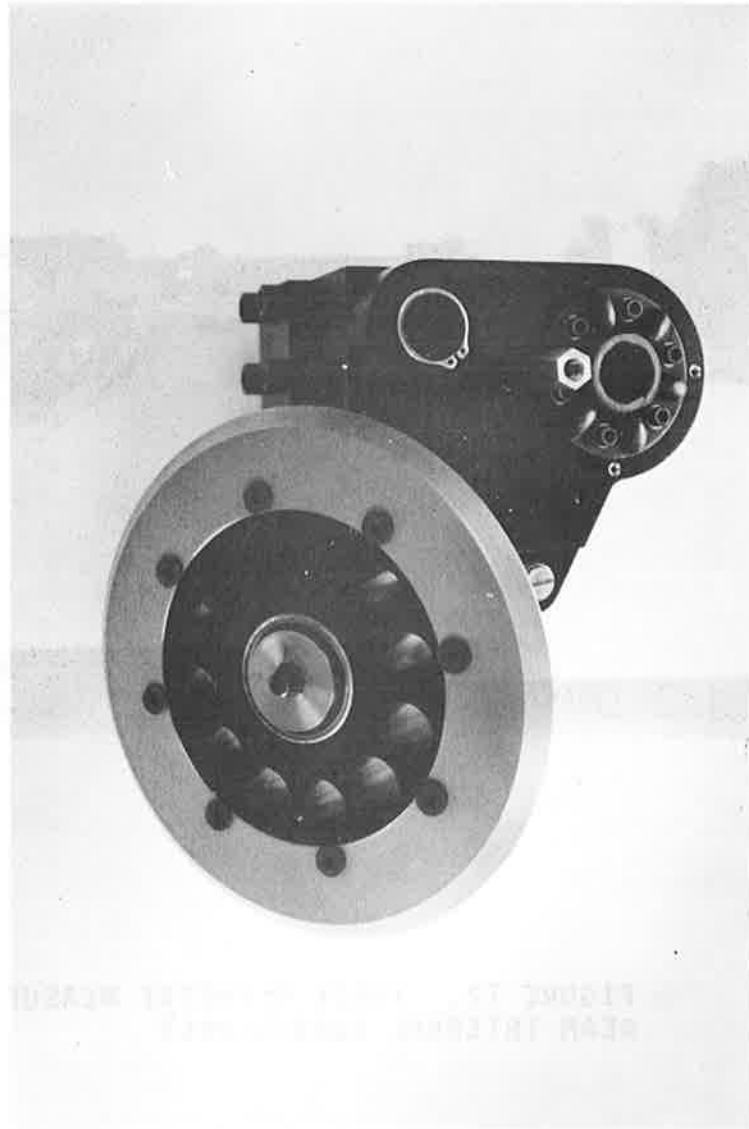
GAGE WHEEL SENSOR CARRIAGE ASSEMBLY
